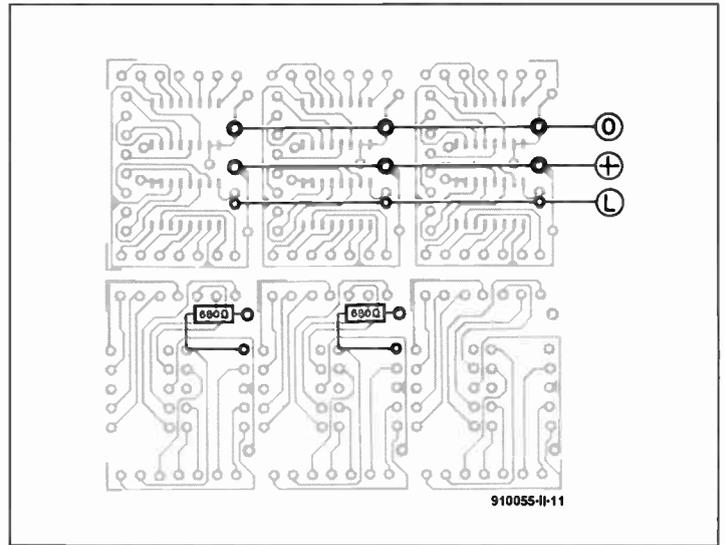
These connection must be made at the rear of the SMA PCB, and wired to connector K8. Also shown here is how the two decimal points of two display can be joined.
